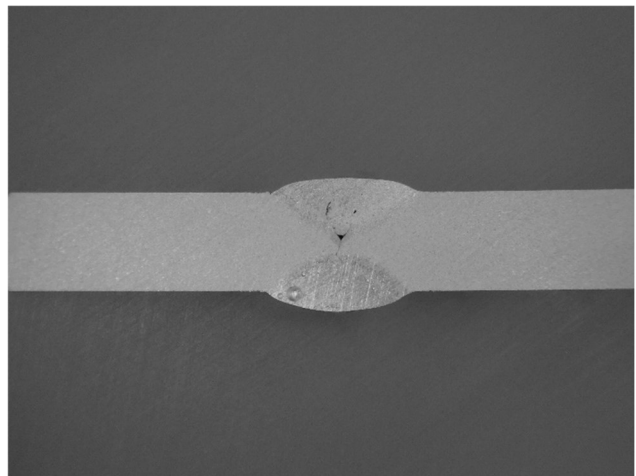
5456-H116 aluminum plate welded with ER5356 rod. Ground to 600 grit finish then etched with AWS D1.2 Basic Etchant.
